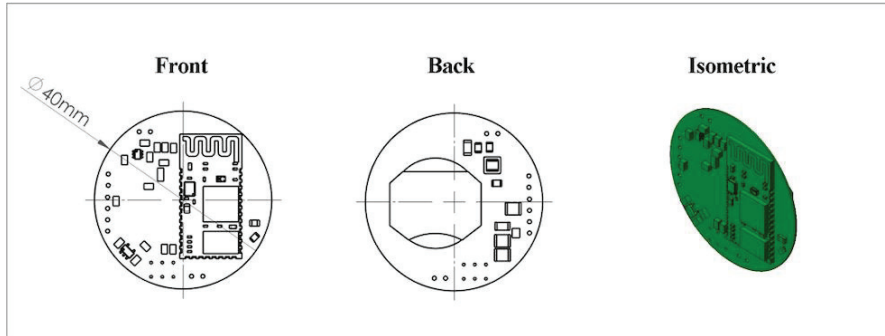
Detailed assembly drawing of designed energy harvesting devices
